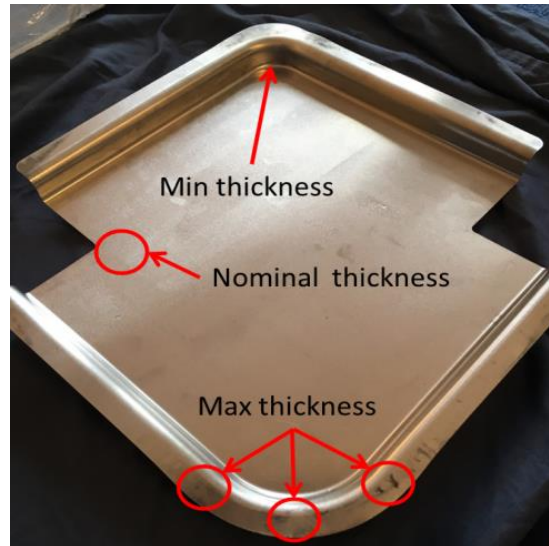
Measurement locations identified on a component produced during the tool try out.
